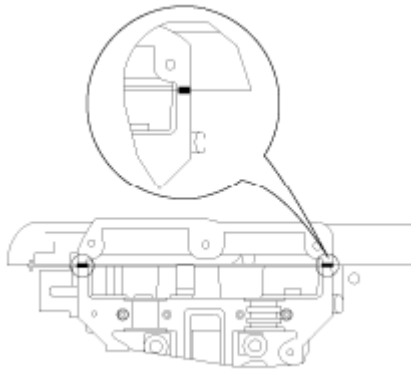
Identifying Sealant Location On Upper Area Between Timing Chain Cover & Cylinder Head
